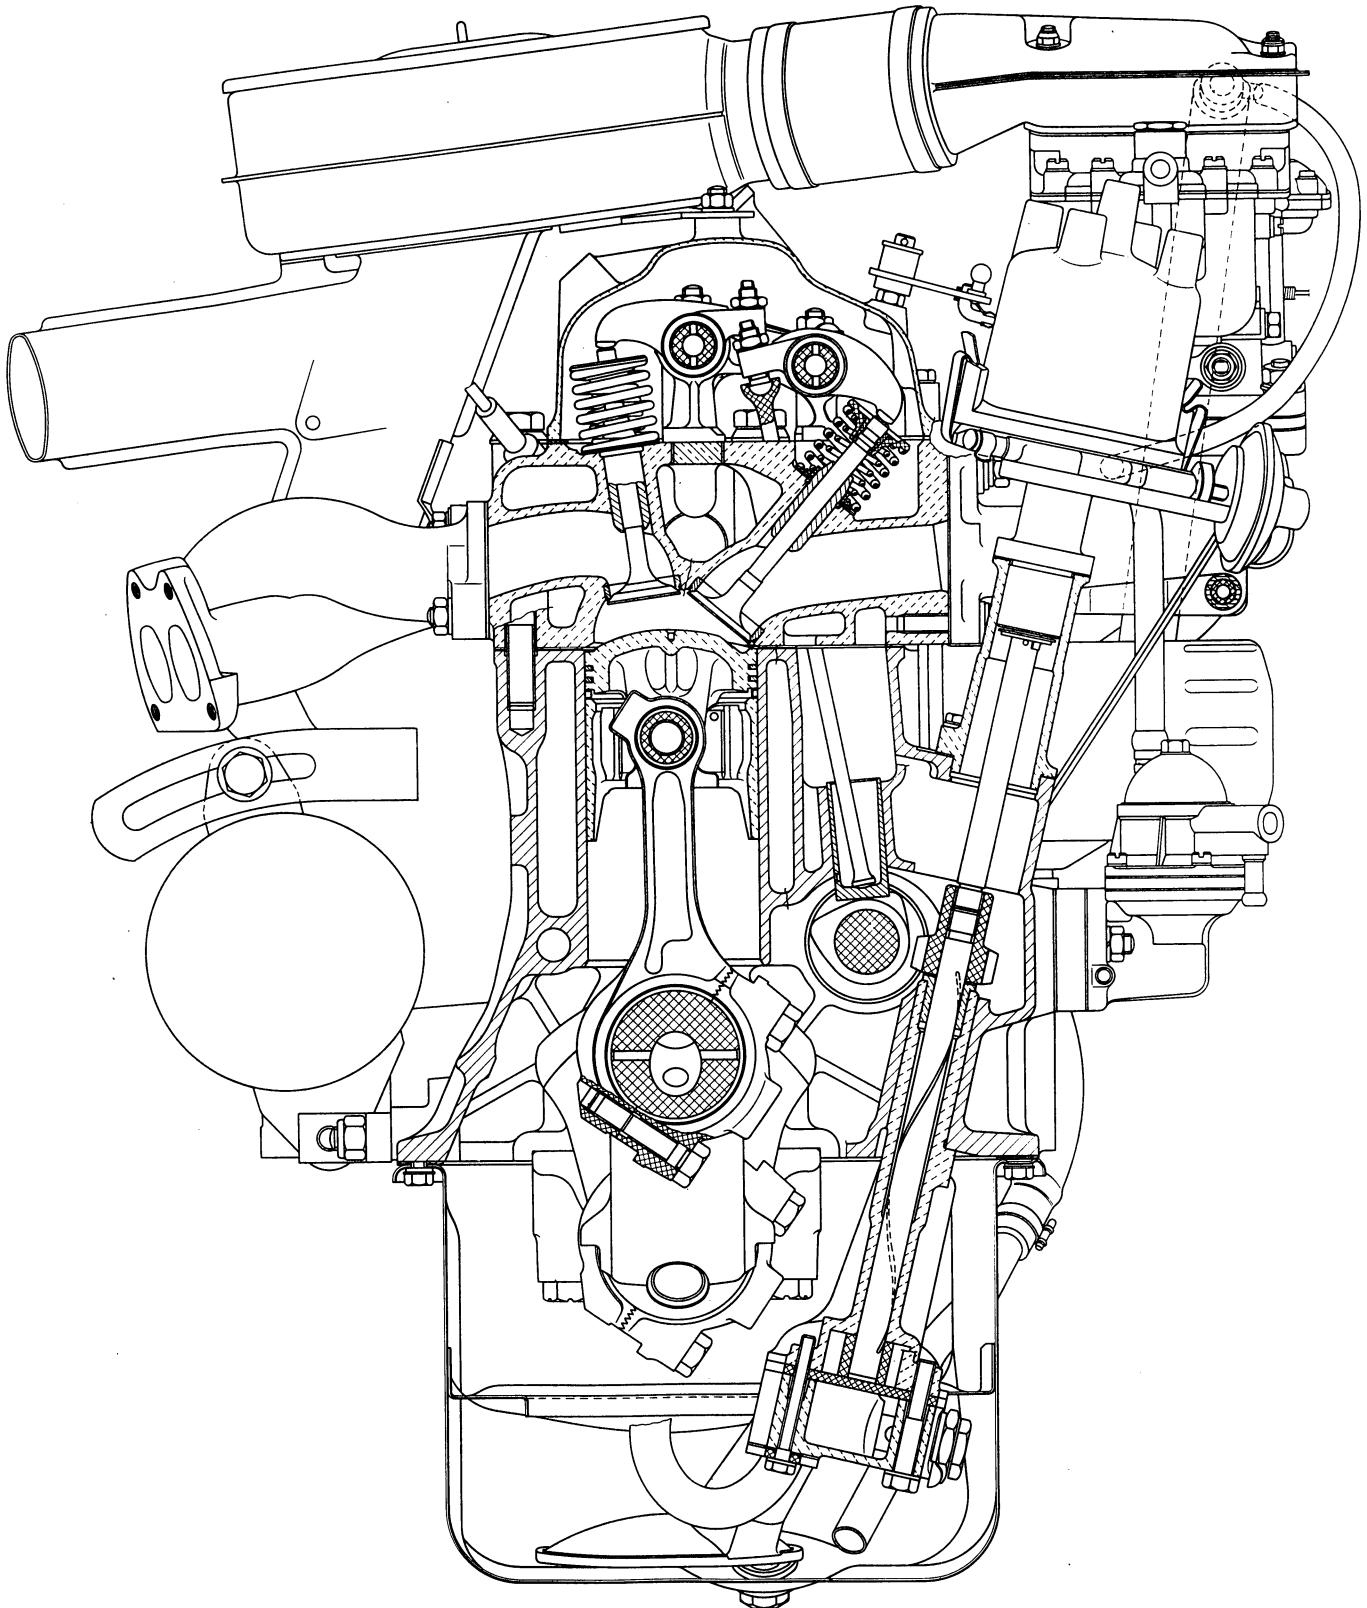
End sectional view of engine 115 C.005 across connecting rod, piston, valves, and oil pump and distributor drive mechanism.
